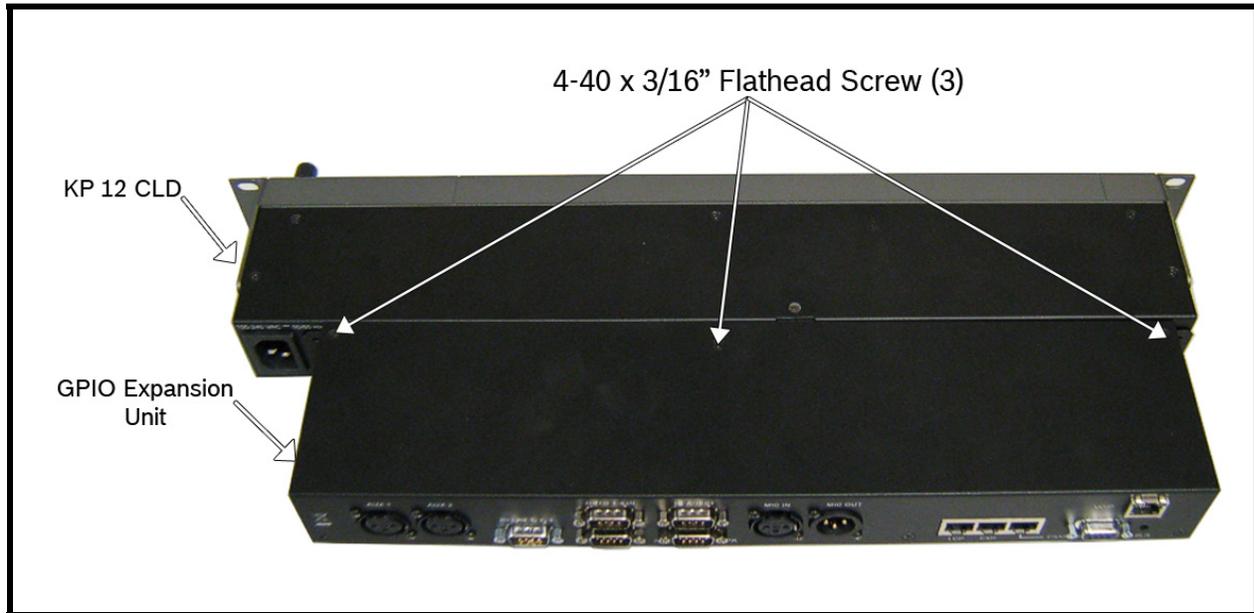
GPIO Expansion Unit — Top Panel Screw Removal
